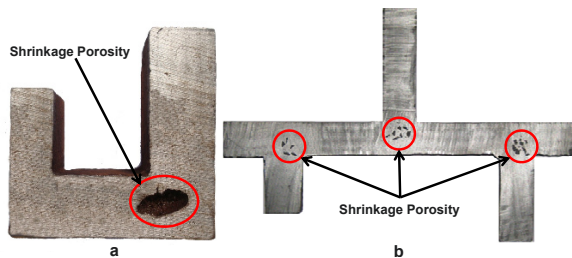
Cut-section. a. 'C' shaped casting; b. Multiple junction casting
